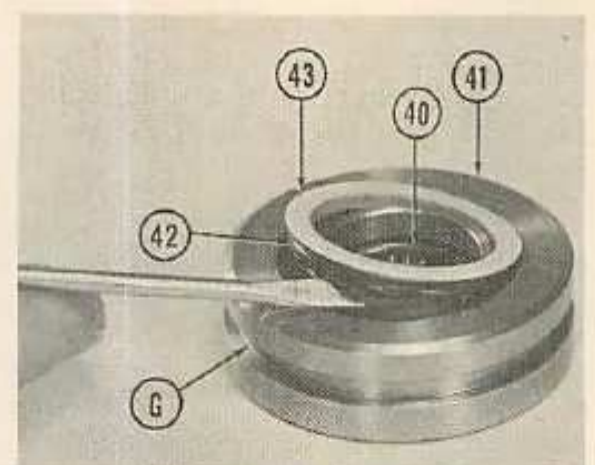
Lifting the Teflon seal (43) and "O" ring (42) from bearing support (41). Needle bearing (40) is serviced separately. Install new "O" ring in groove (G)
